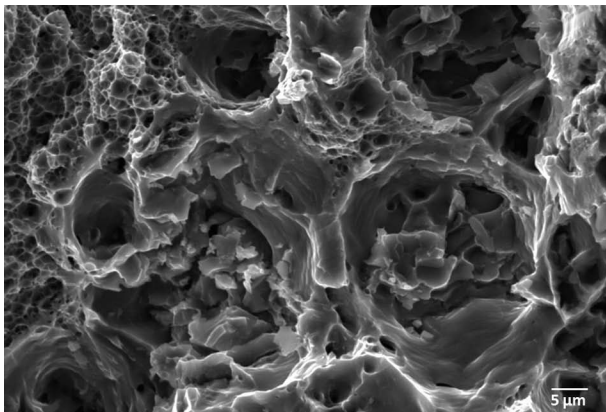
High magnified image of the fracture surface shown in Fig. 166 indicating ductile fracture
